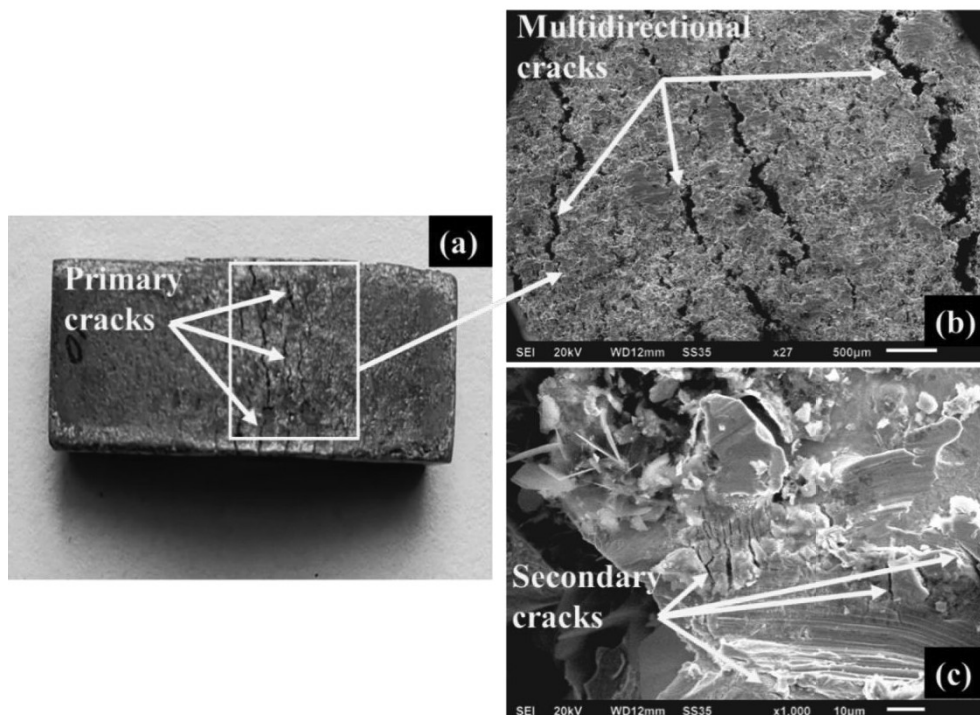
Fractured EWAC-10WC10Co2Ni clad specimen after 3-point bend test
